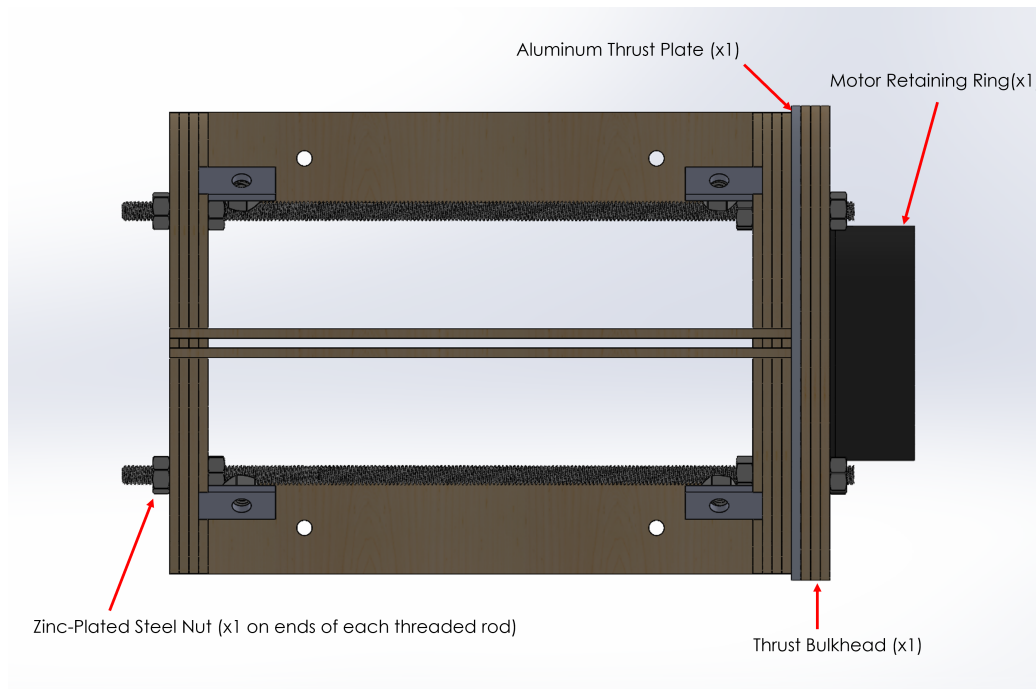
Thrust plate, thrust bulkhead, and motor retaining ring attached to removable fin system assembly.
